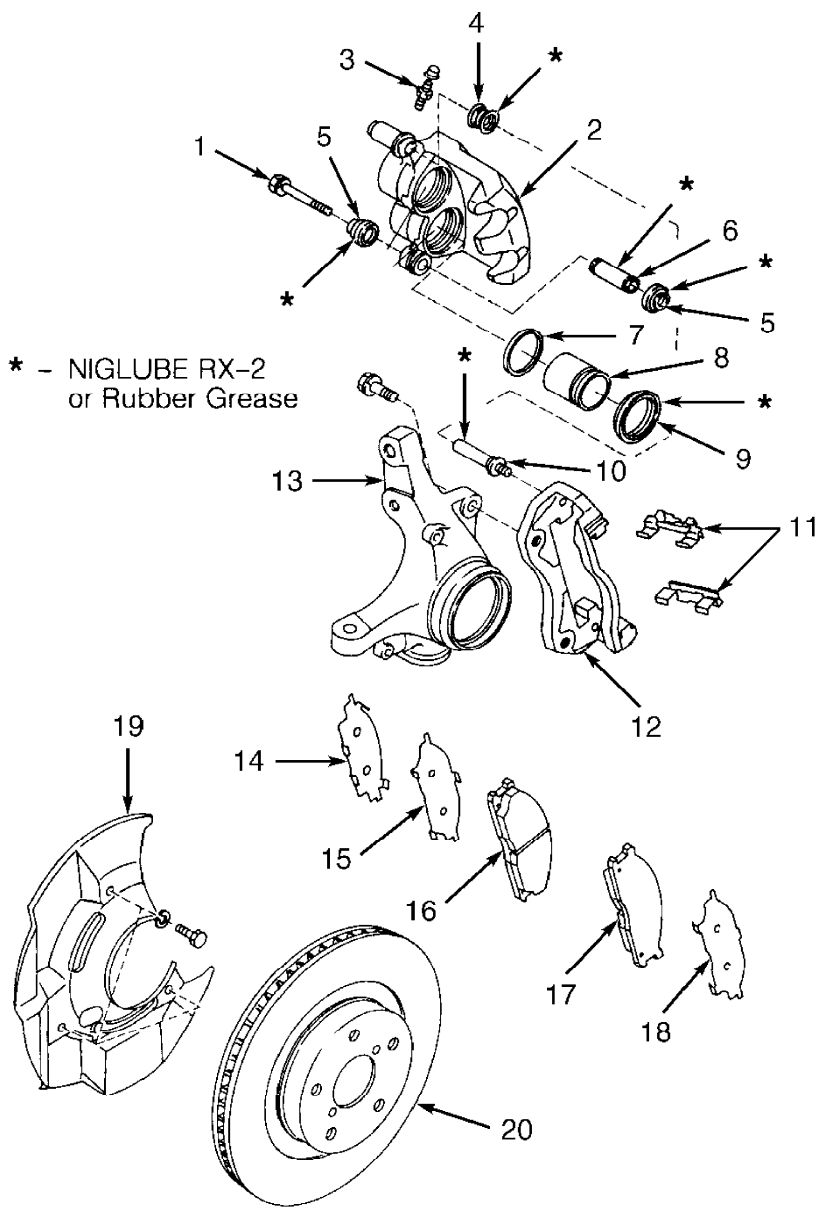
Identifying Front Disc Caliper Components (Loyale)
